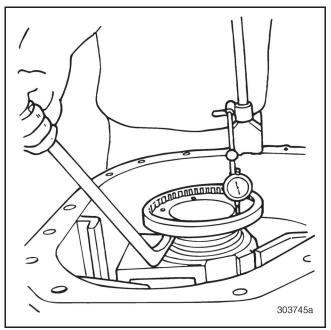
Measuring Main-Drive Shaft Bearing End Play
